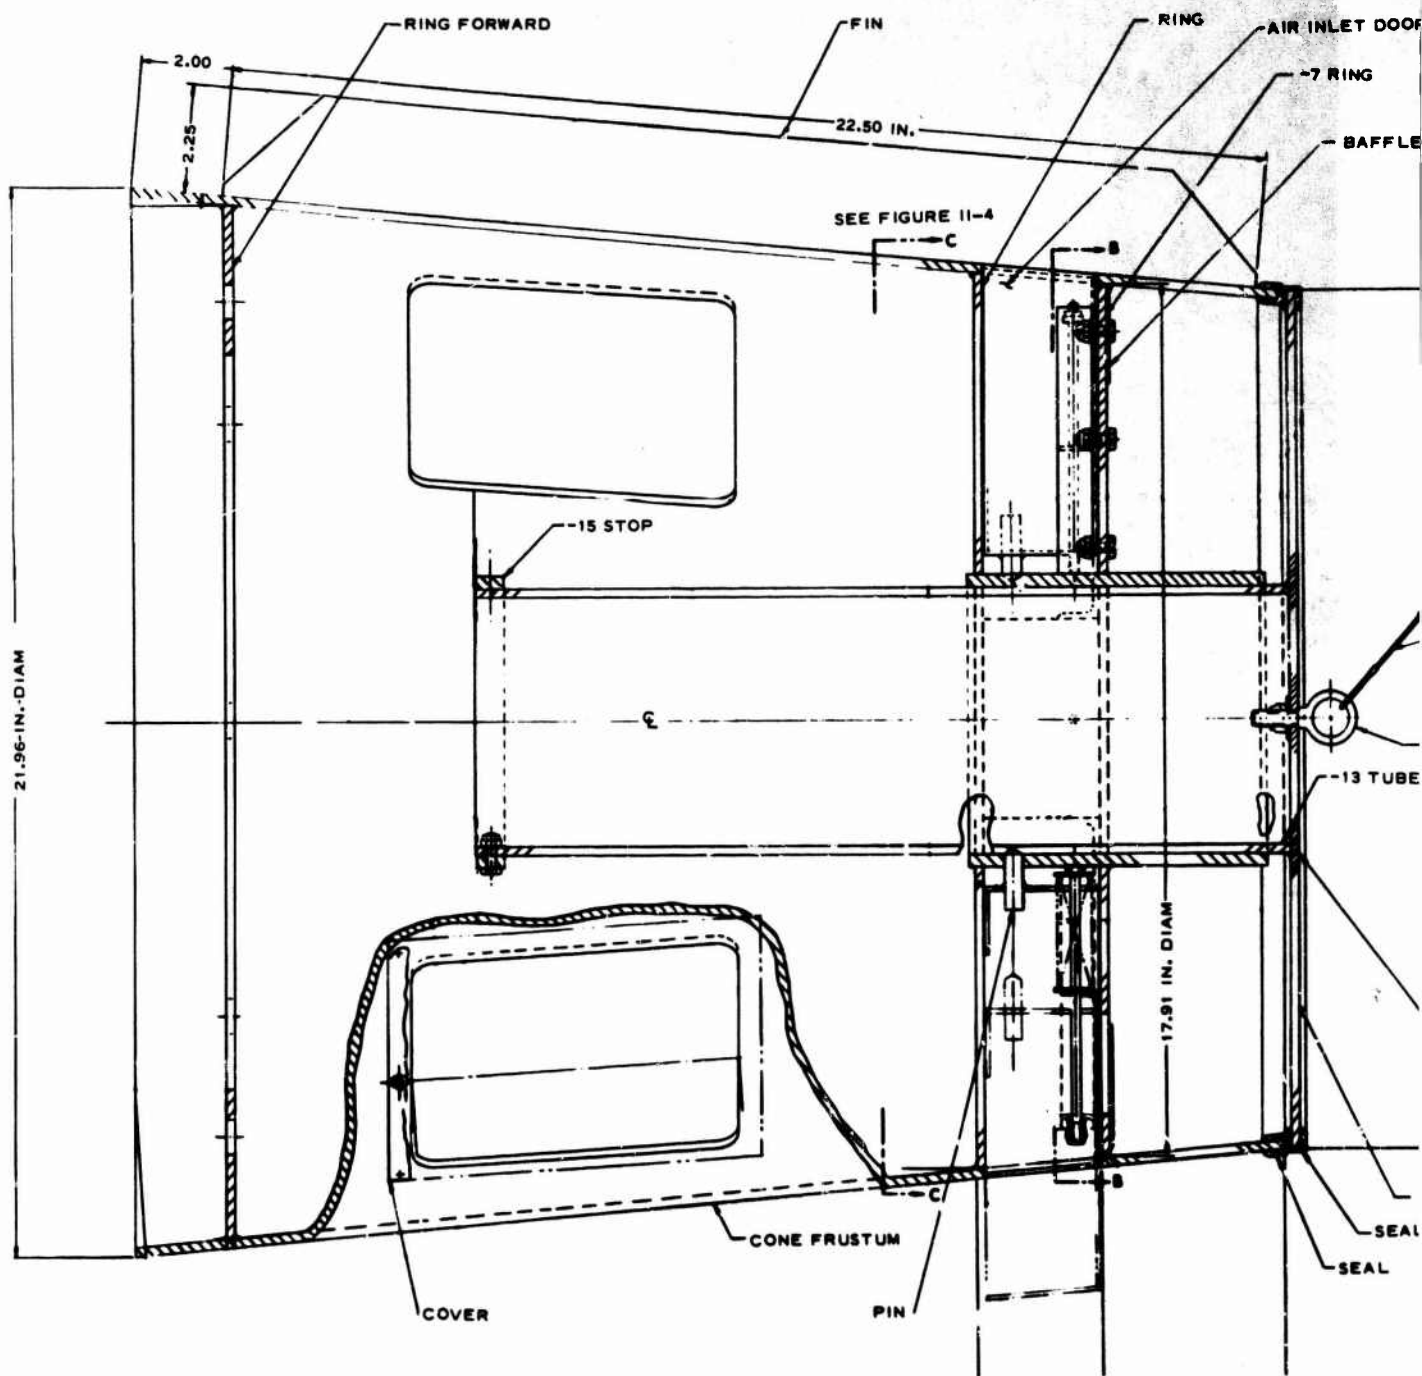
M-118 Bomb Canister Assembly (View Looking Aft)
